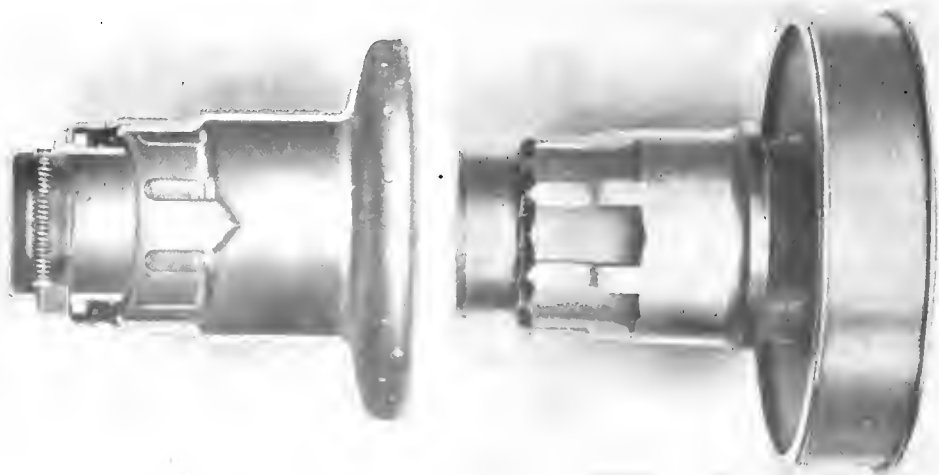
Inner and outer hubs of detachable wheel showing driving keys
